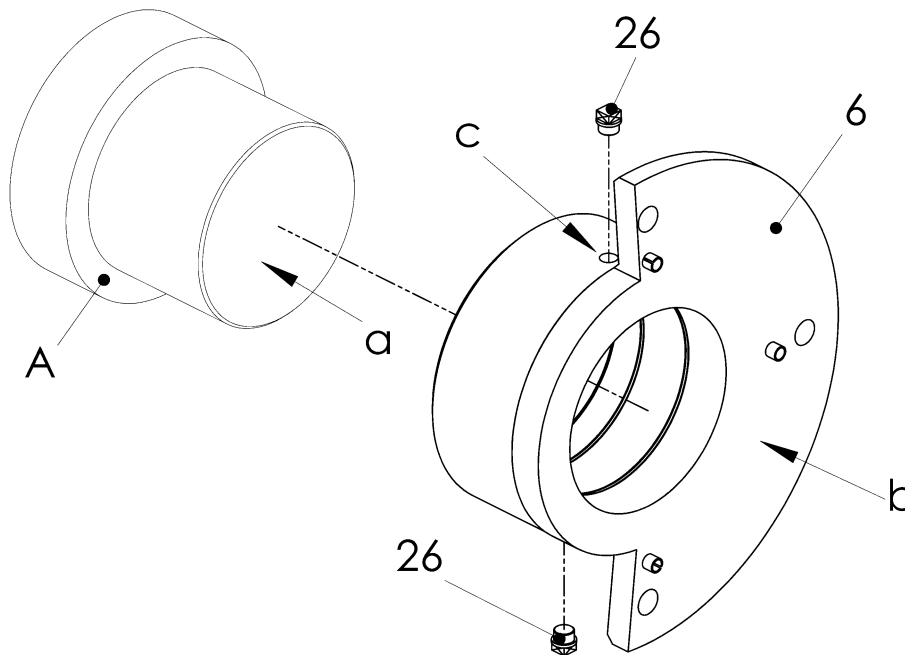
Mounting the hub with cylindrical oil interference fit
